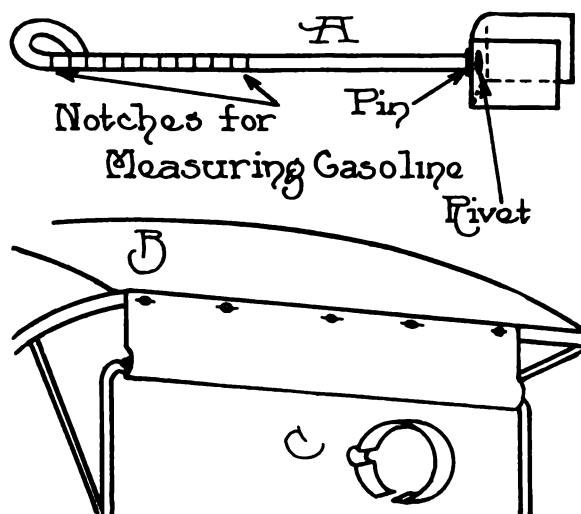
A, Handy Instrument for Ford Car Owners; B, Device to Check Drafts at Top of Windshield; C, Spring Clamp.
